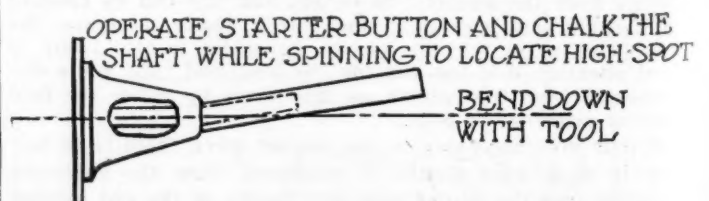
STRAIGHTENING FORD STARTER SHAFT WITHOUT REMOVING STARTER FROM CAR
